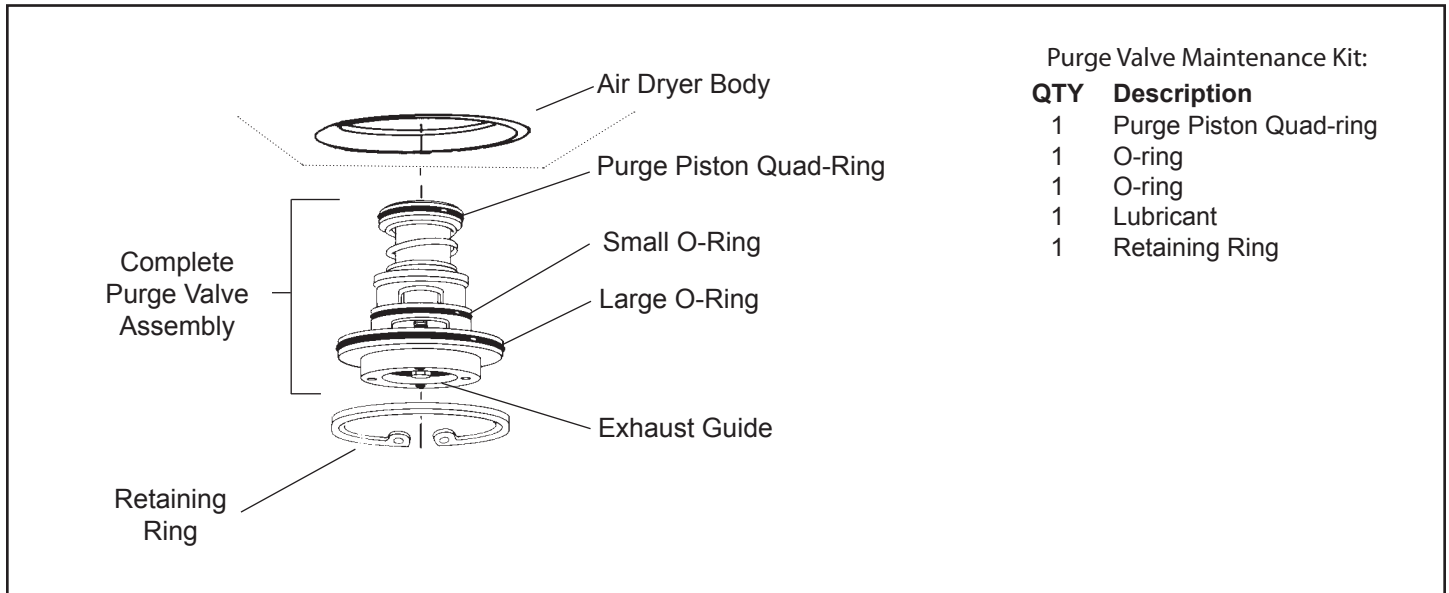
AIR DRYER PURGE VALVE EXPLODED VIEW
